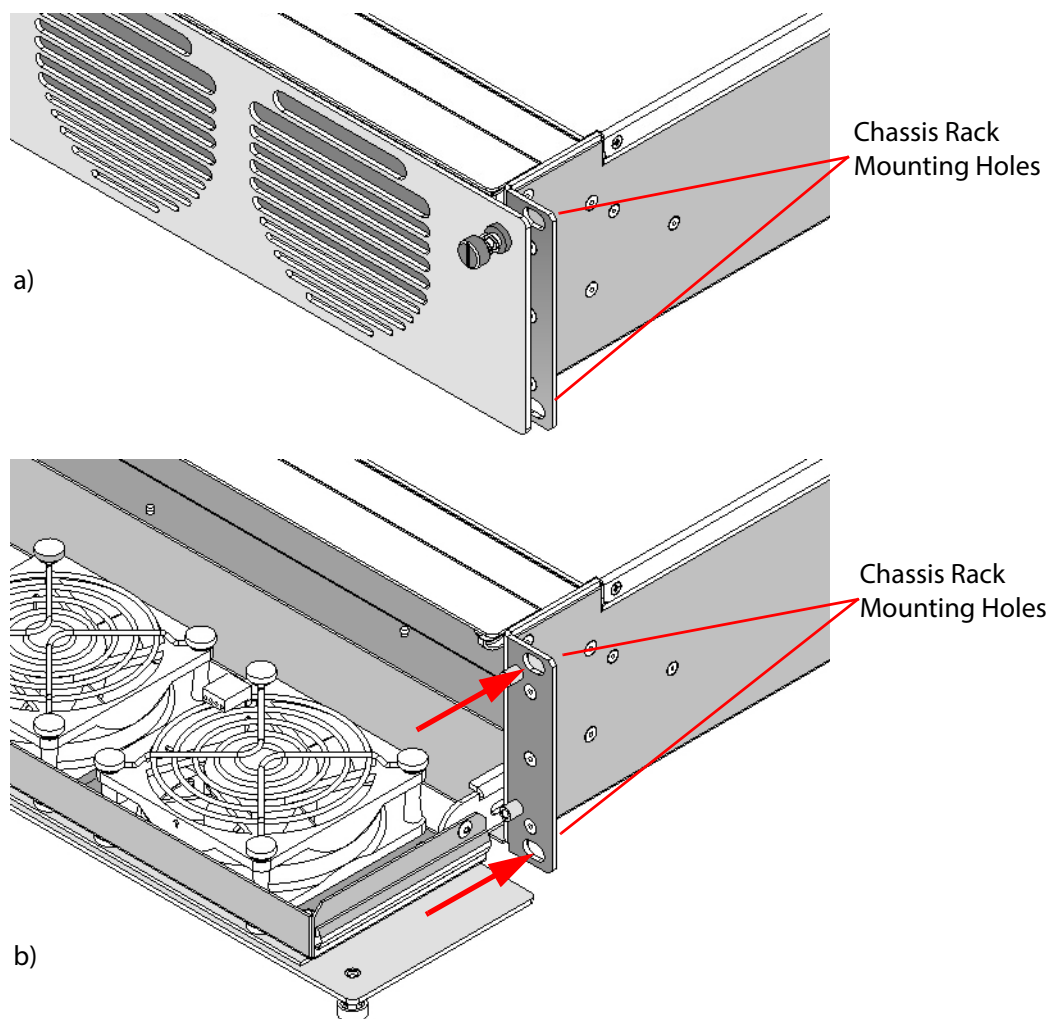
MV-821 Multiviewer Chassis Rack Mounting Holes
